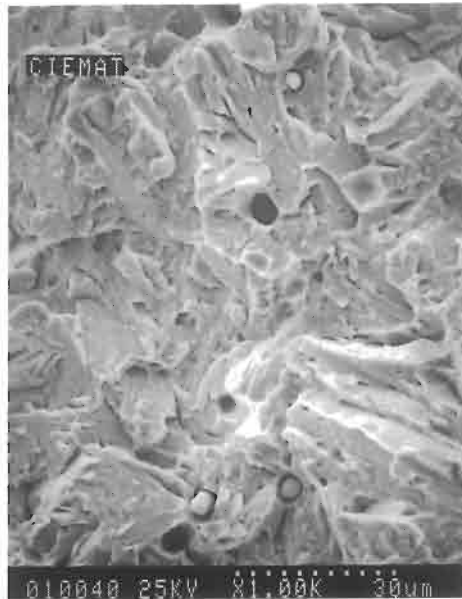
Fracture surface of the failed chromium-plated sleeve (center).
